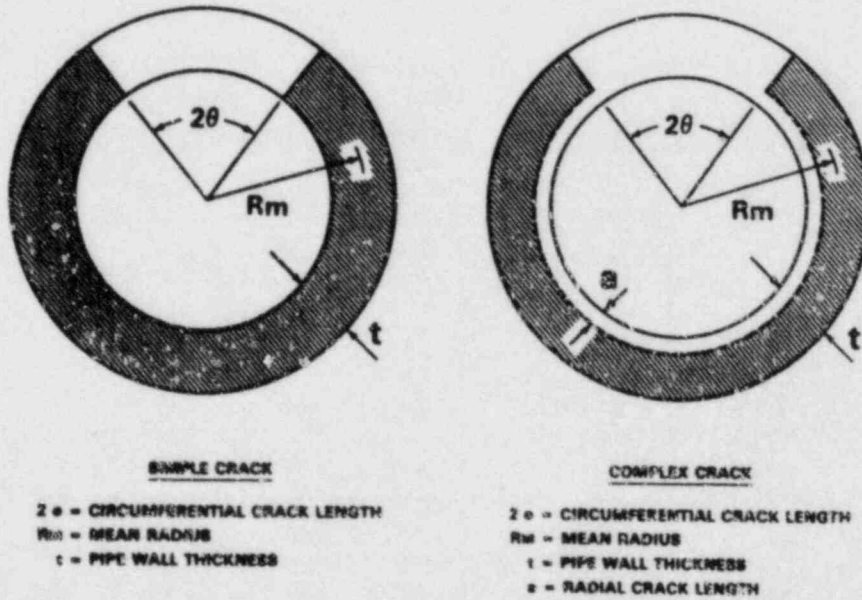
Schematic of Crack Geometries for 4 in. Diameter Type 304 Stainless Steel Pipe Specimens
